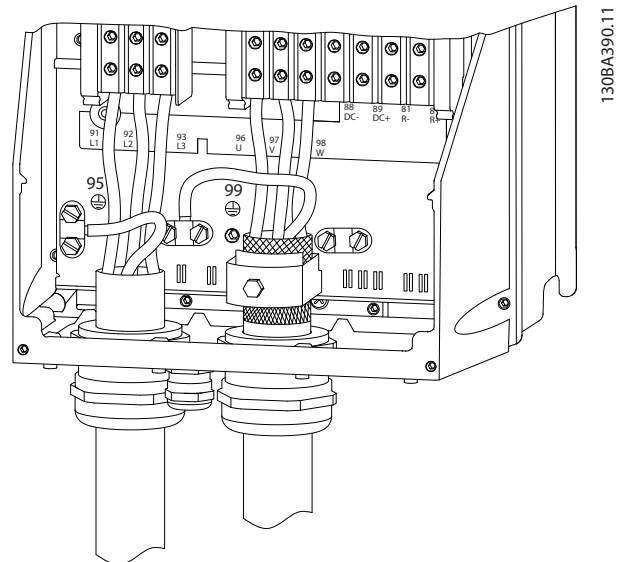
Motor, Mains and Earth Wiring for B-Frame Sizes and Above Using Shielded Cable
